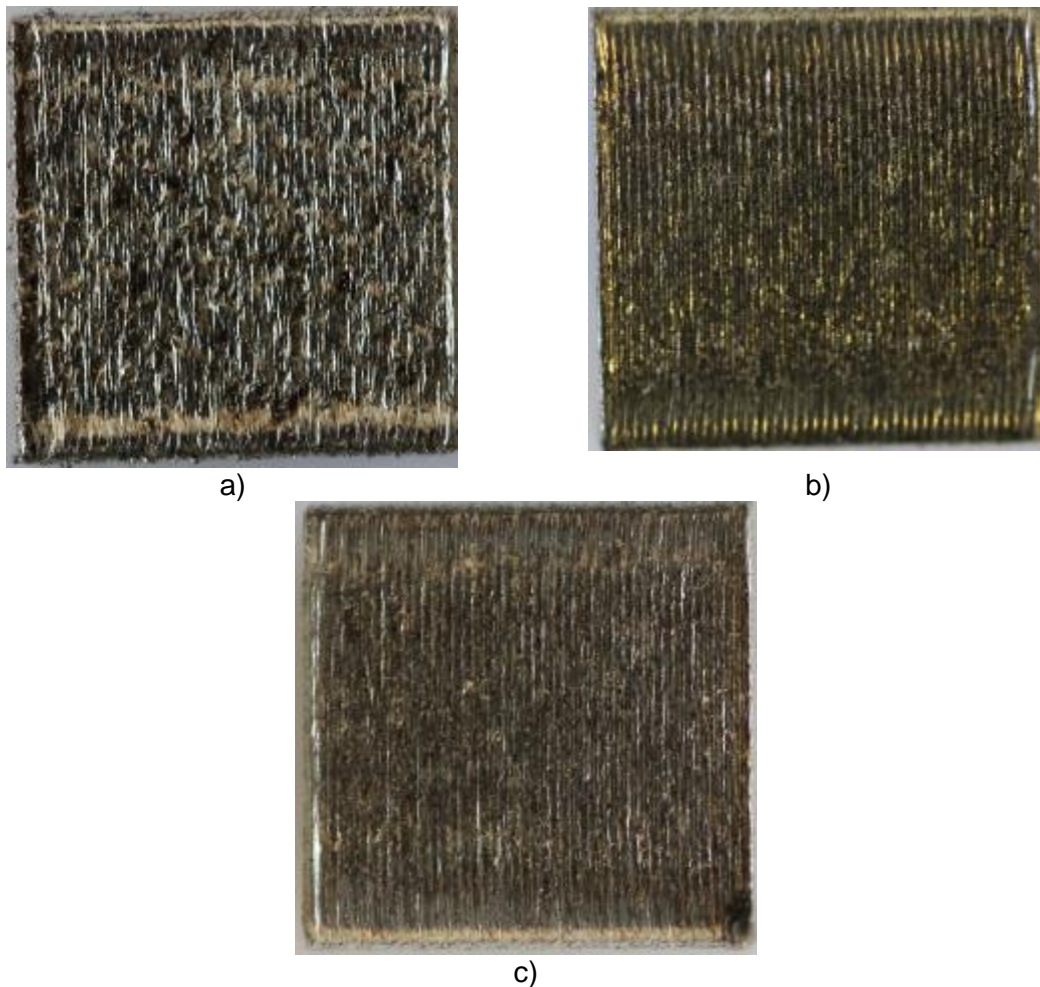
Macroscopic view of specimens manufactured with different defocusing distance: -0.5 mm (a), +0.5 mm (b) and 0 mm (c). Actual size 10 x 10 mm².
